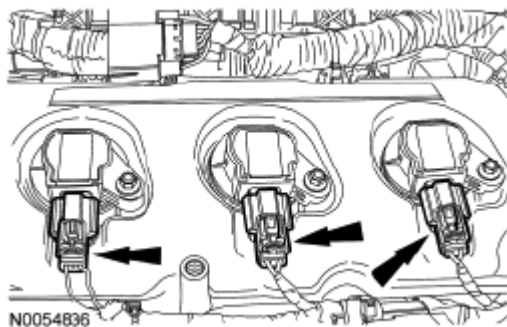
Locating LH Coil-On-Plug Electrical Connectors
